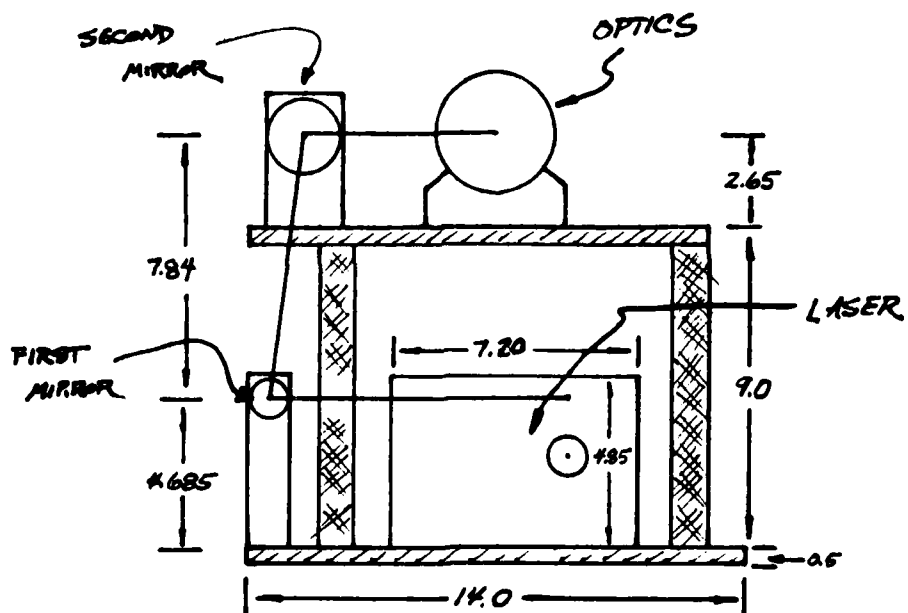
FINAL PROPOSED LAYOUT, END VIEW
